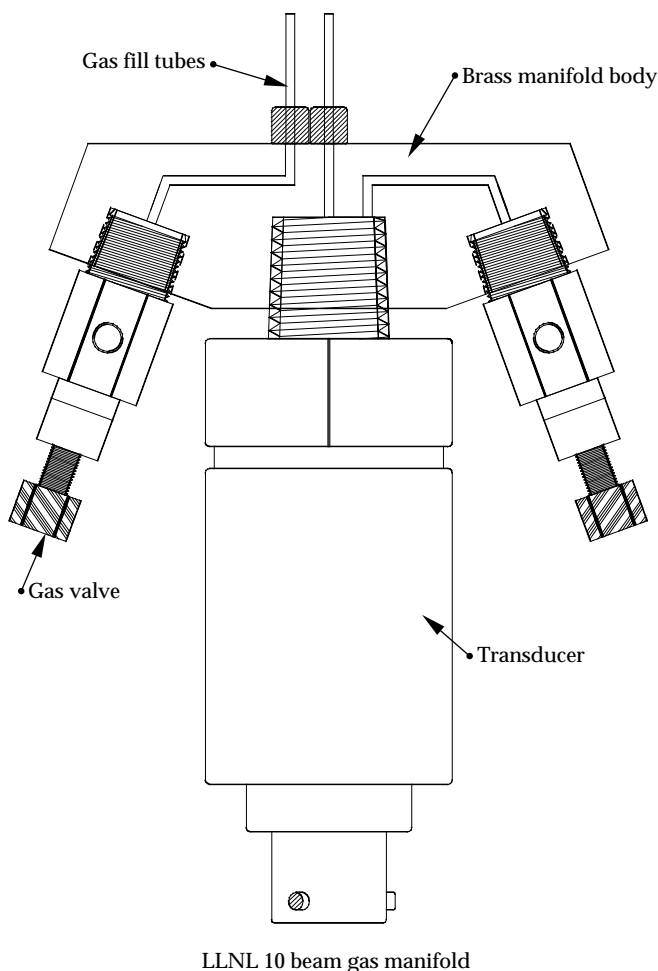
A CAD drawing of a target manifold with a transducer, valves, and gas fill lines. (10-00-0795-1781pb01)
